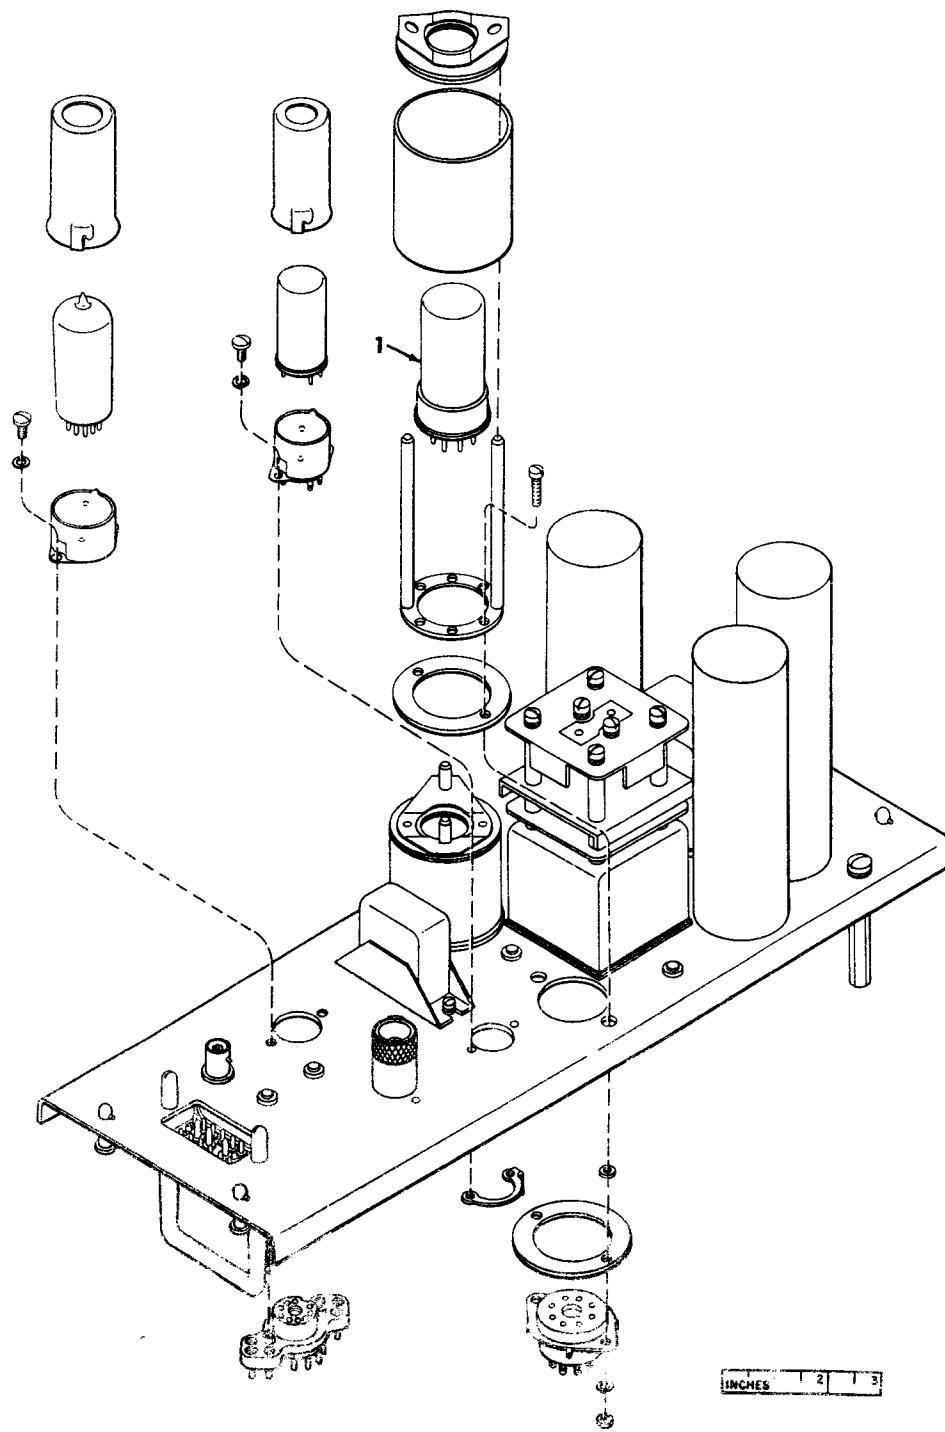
Generator, pulse O-303/M (8007725) - partial exploded view
